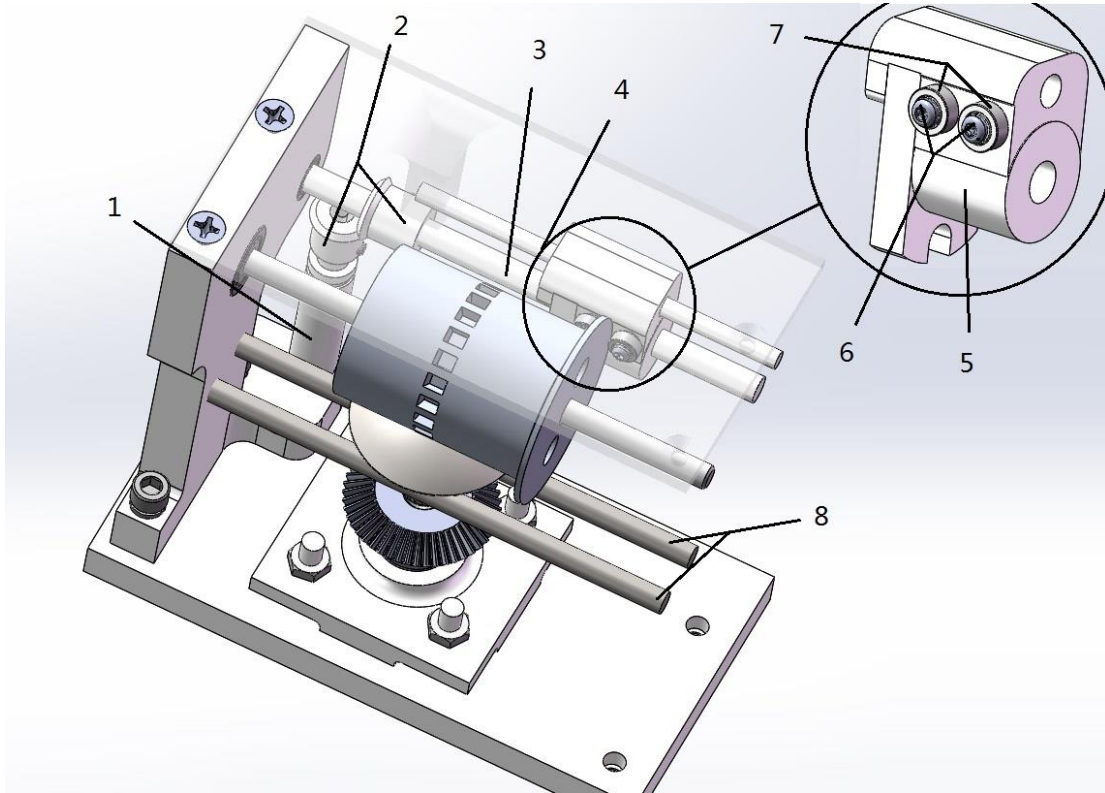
Configuration of the linear actuation. 1. Miniature BLDC motor, 2. bevel gear set, 3. lead screw, 4. aluminum rod, 5. wear compensating nut, 6. machine screw, 7. miniature ball bearings, and 8. stainless steel bars.
